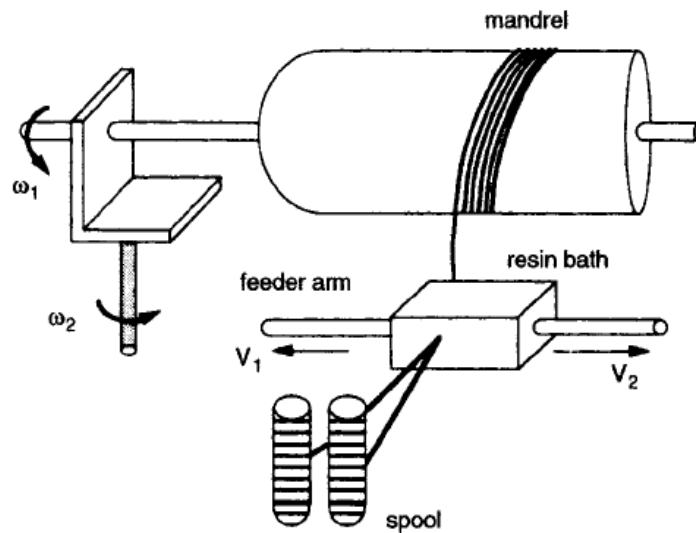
Schematic diagrams of filament winding for producing FRP pipes [20]
